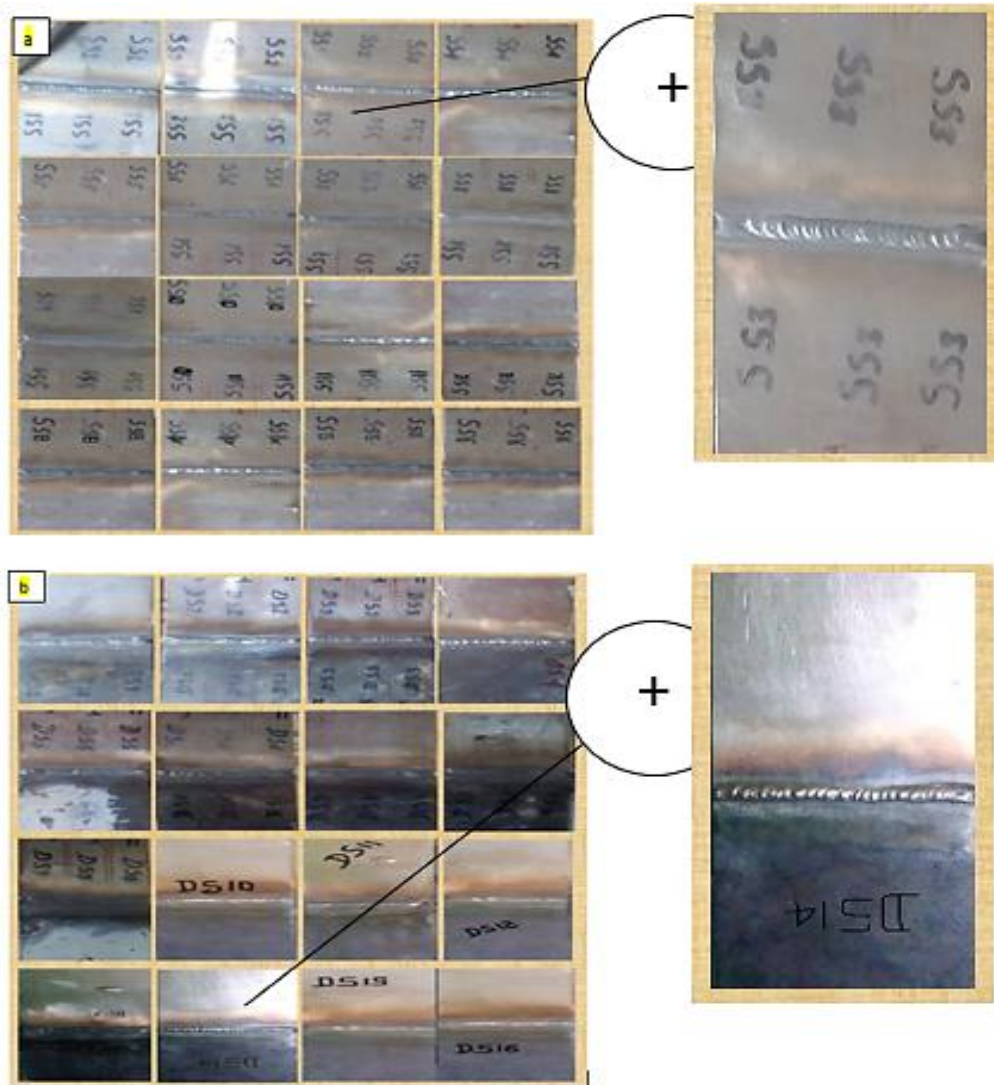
welded samples before polishing, a) similar samples, b) dissimilar samples
